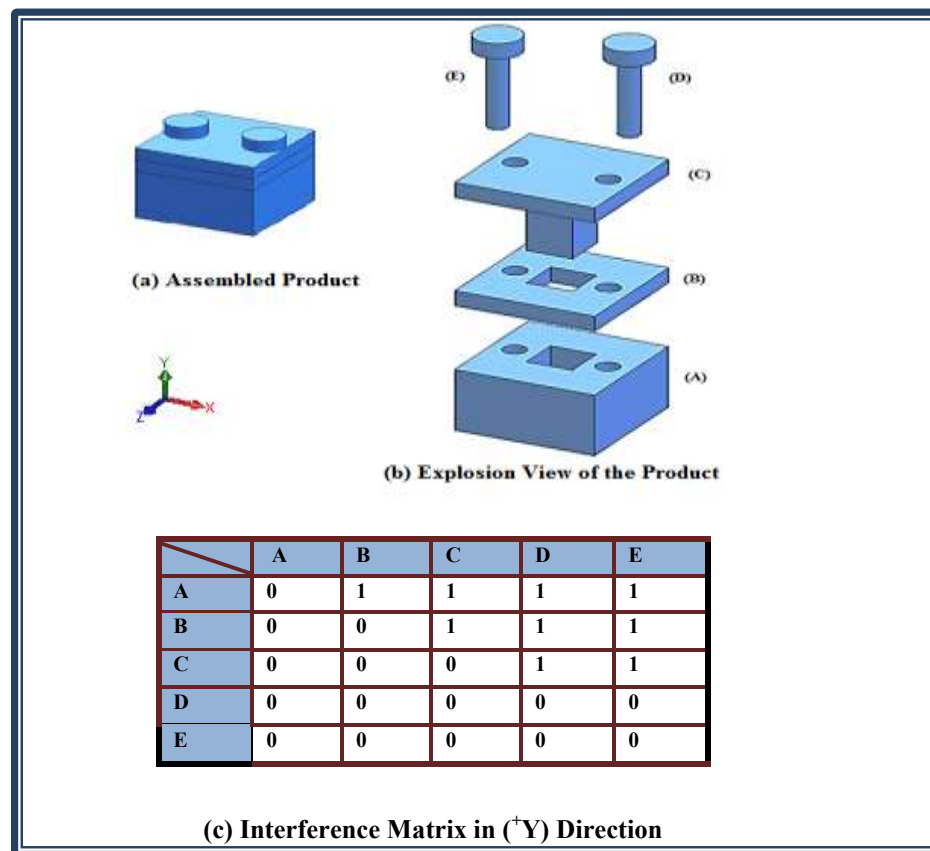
Disassembly Interference Matrices of the Product in + Y direction (a) Assembled Product, (b) Explosion View of the Product, (c) Interference Matrix
